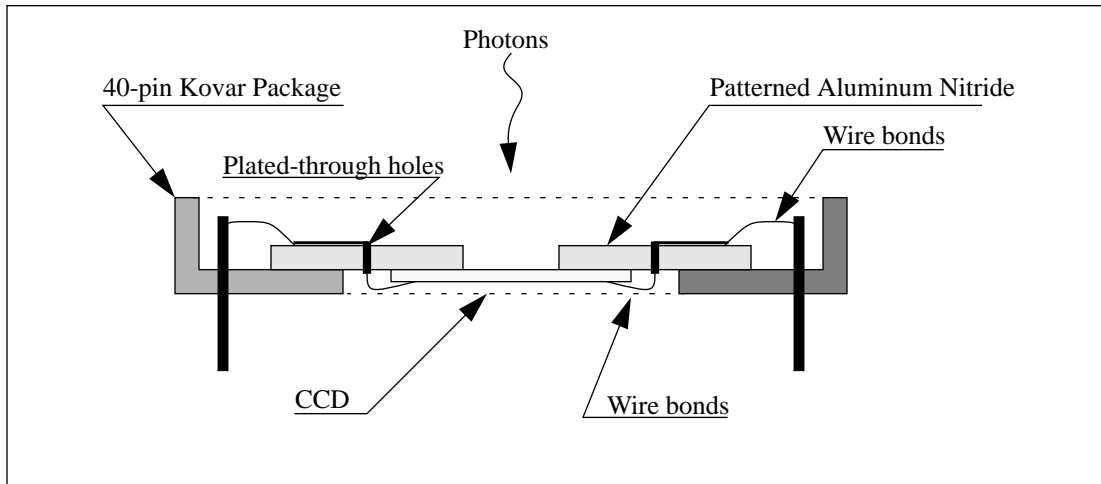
A schematic drawing of the simple mounting for a backside-illuminated CCD.
